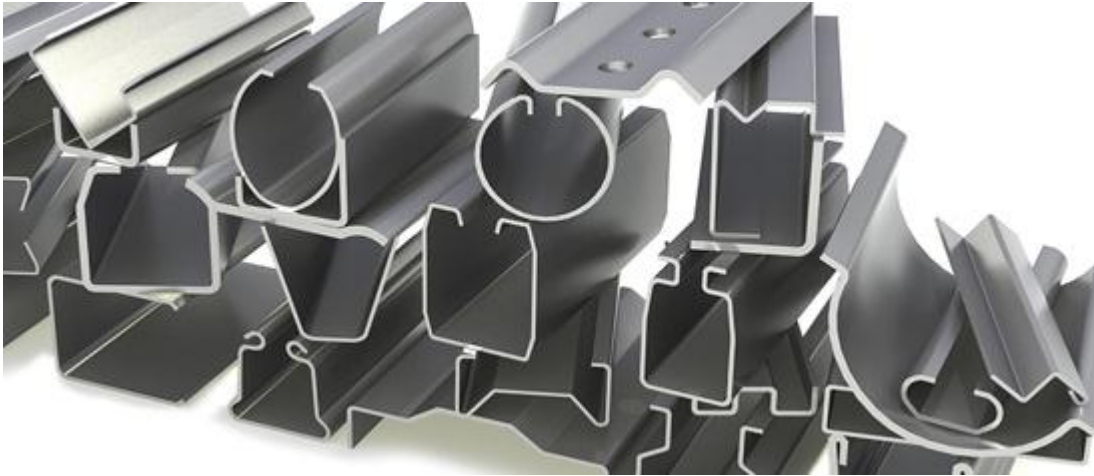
Various Shapes of Cold Formed Steel Sections
